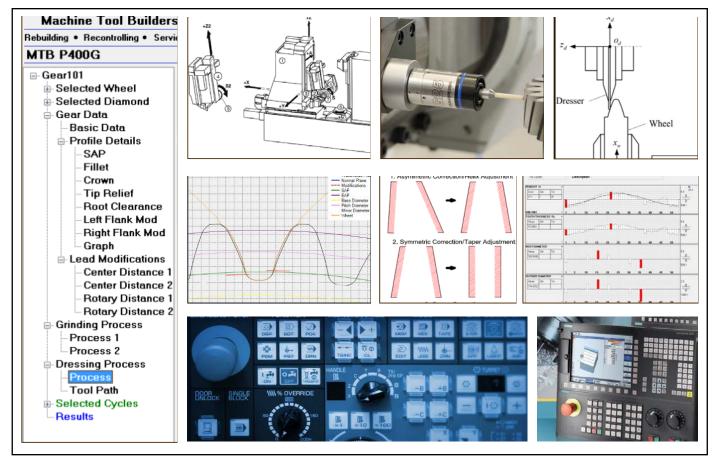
Example of contemporary gear form grinding machine with a lot going on.
